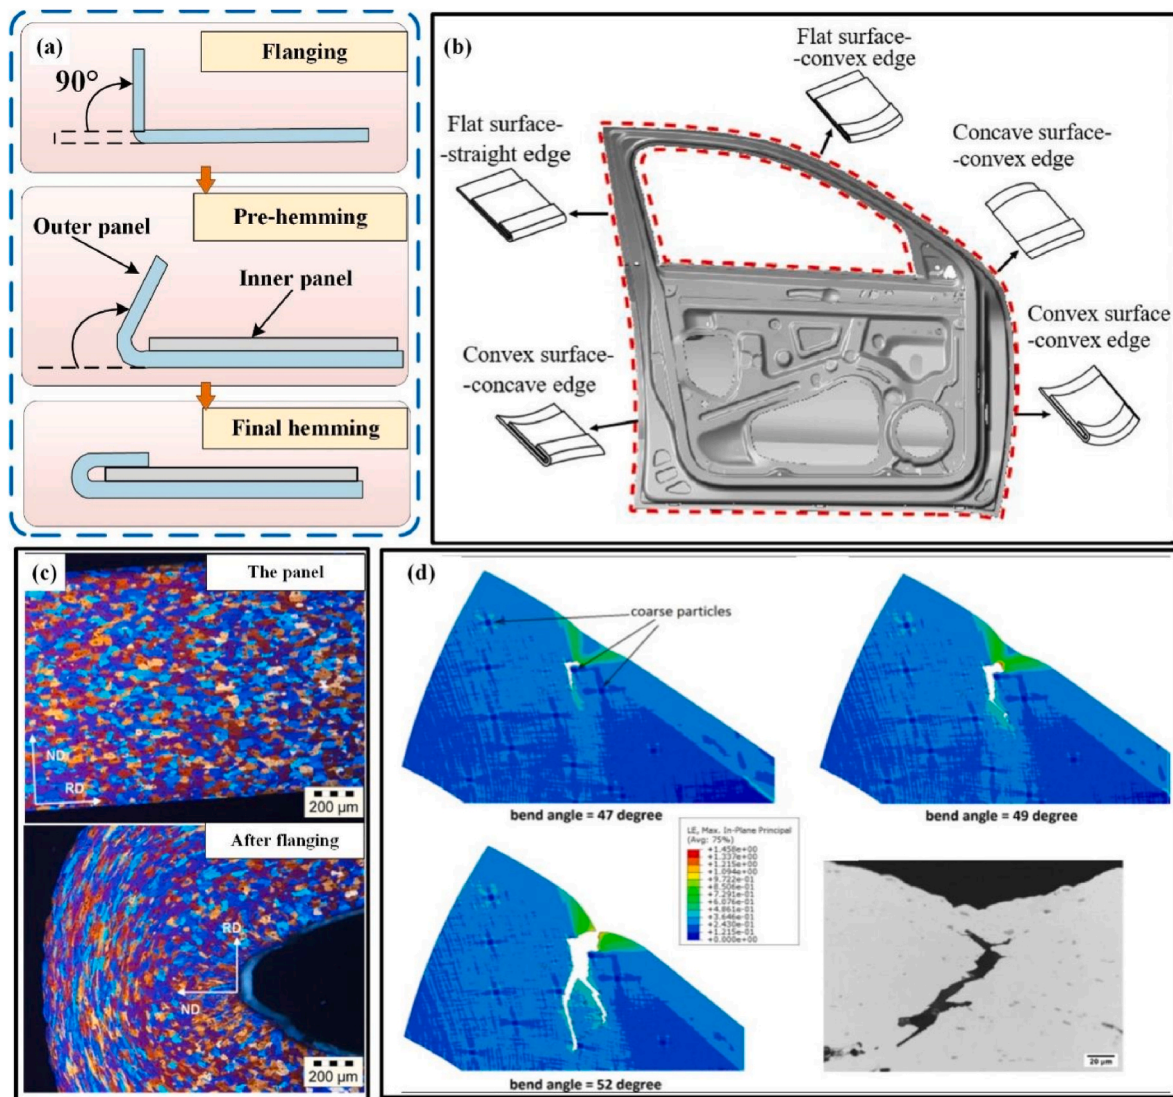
(a) Schematic diagram of alloy sheet flanging; (b) types of flanging [64]; (c) comparison of microstructures of Al–Mg–Si alloy plates before and after flanging [65]; (d) plate failure from hard particles under impact [66].
